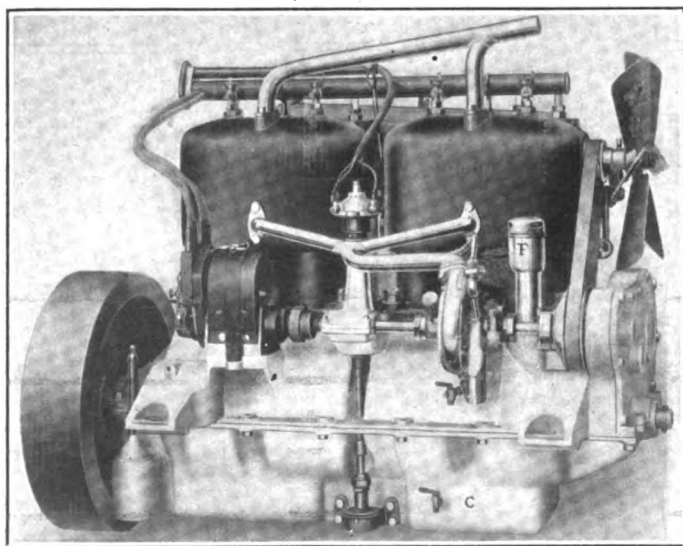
Right side of the Selden 40-horsepower motor, showing the magneto and pumps
